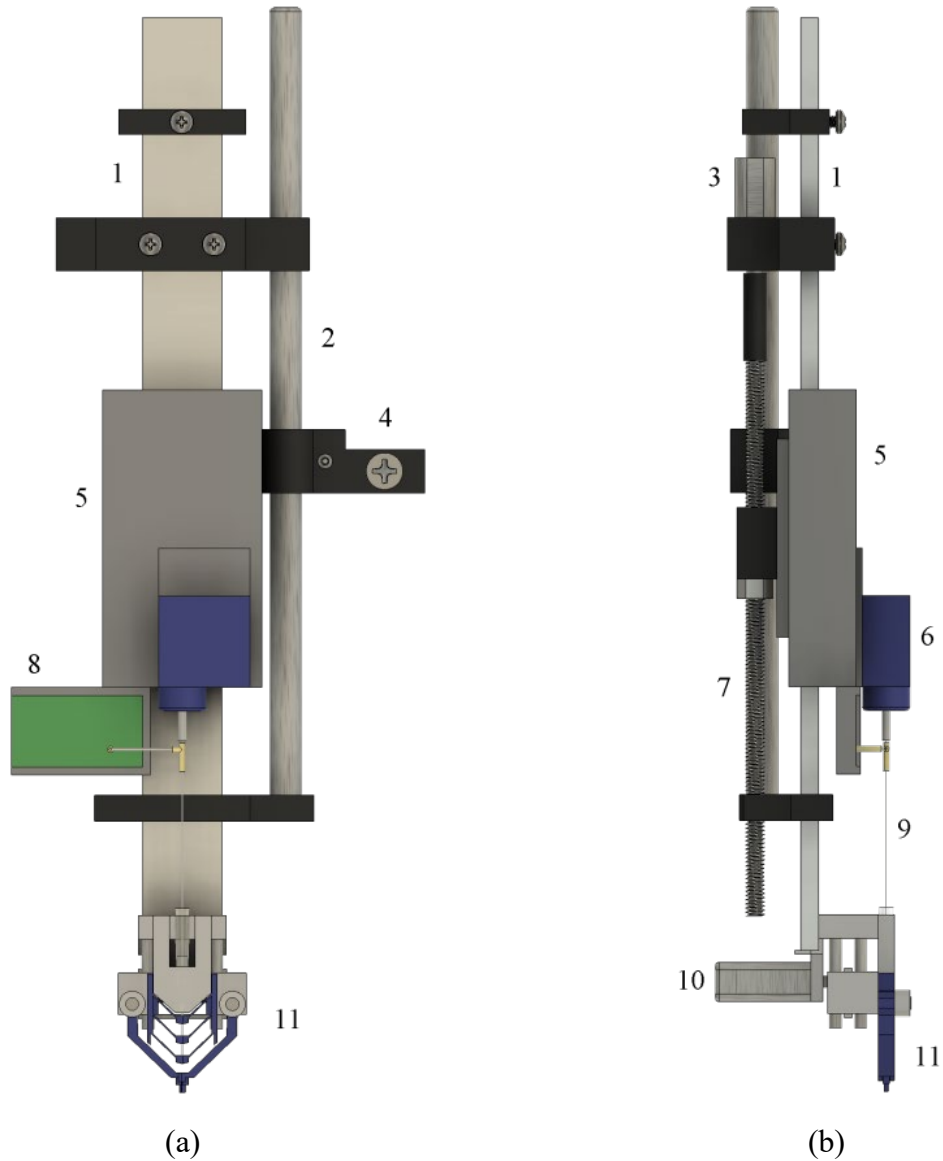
3D model of the microelectrode inserter designed in Fusion 360. (a) Front view of the inserter. (b) Side view of the inserter. [1- Caliper Frame, 2- Support Rod, 3- Insertion Motor, 4- Stereotaxic Arm Clamp, 5-Movable Vernier Scale, 6- Spinner Motor, 7- Lead Screw, 8- Neural Amplifier Board, 9- Electrode Holder, 10- Guide Lifting Motor, 11- Electrode Guide] © [2019] IEEE Reprinted with permission from [57].
